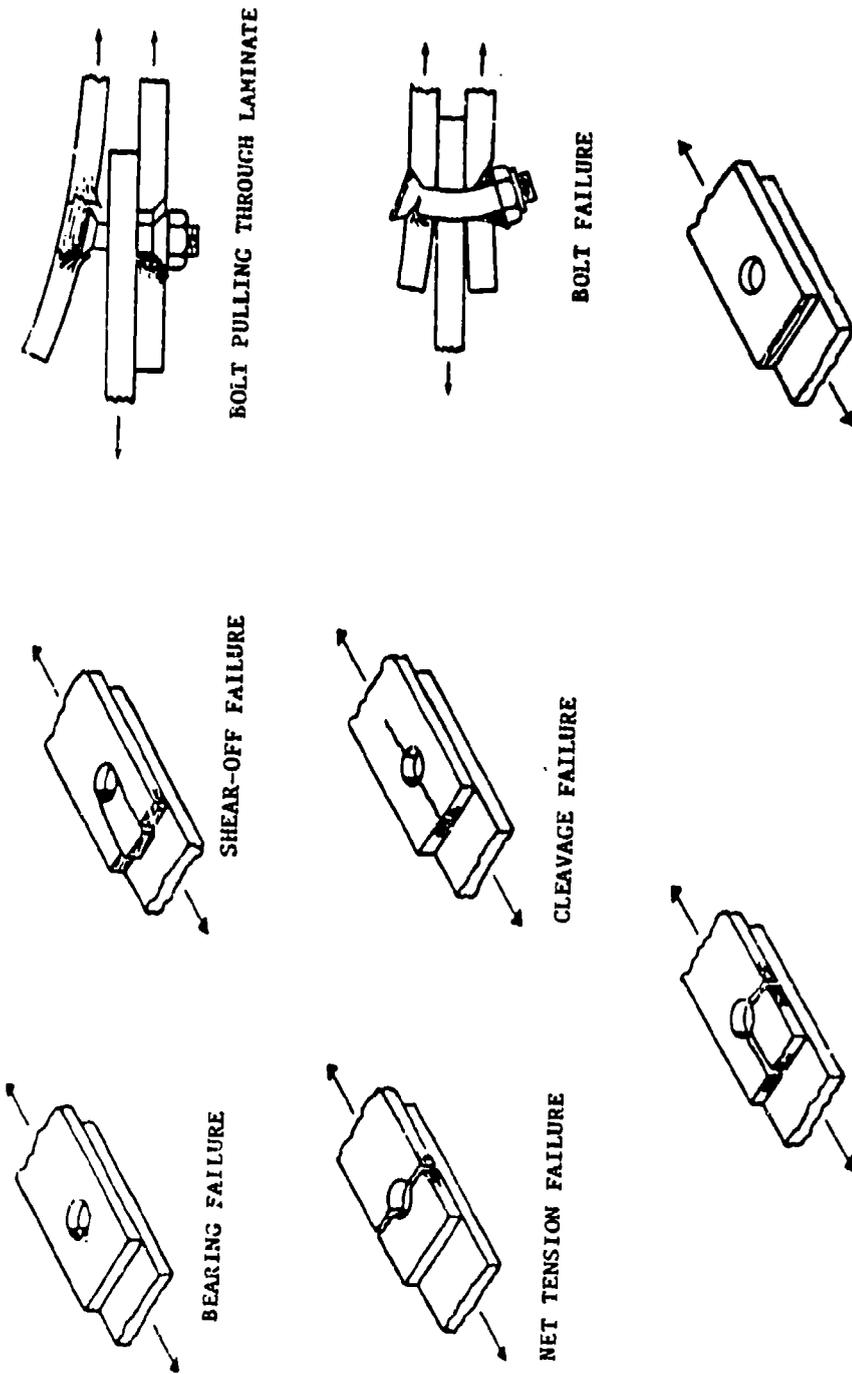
Basic Failure Modes in Bolted Laminates and Fastener-Related Failures.
